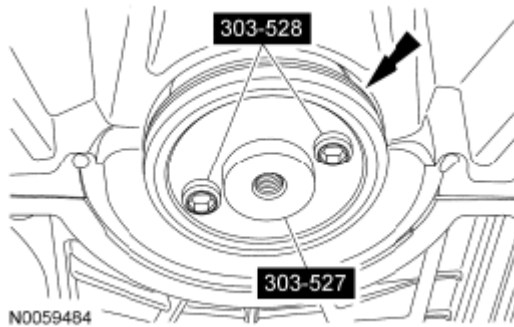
Identifying Crankshaft Rear Oil Seal Screws
